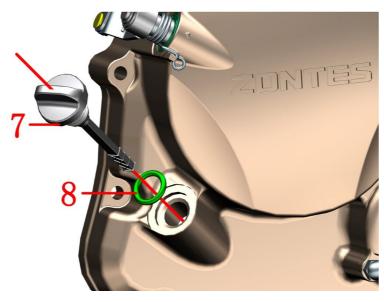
RIGHT CRANKCASE		ZT180MN right crankcase cover assembly-2	CHK	(0)
